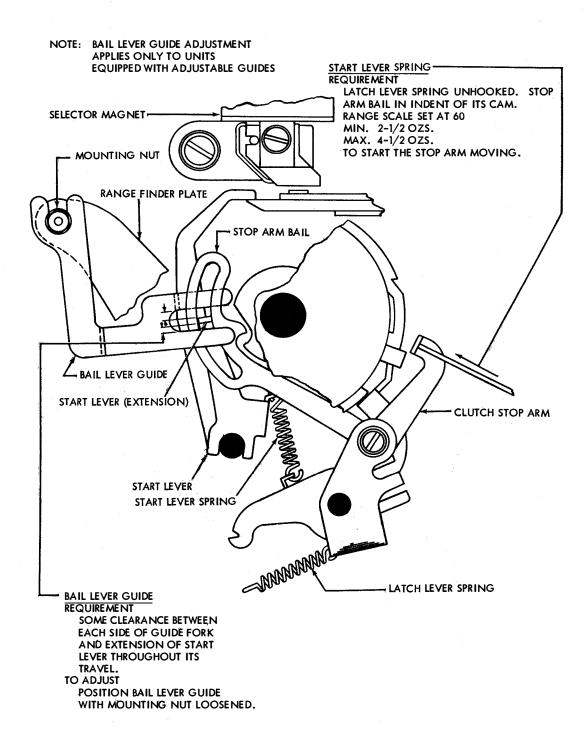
TYPING UNIT, SELECTOR CLUTCH MECHANISM, RIGHT SIDE VIEW
